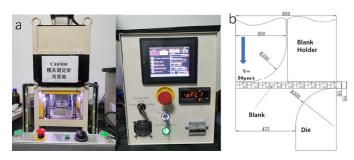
Experimental equipment and mold diagram: (a) Equipment (b) key parameters of MDD tools (unit: μ m)
